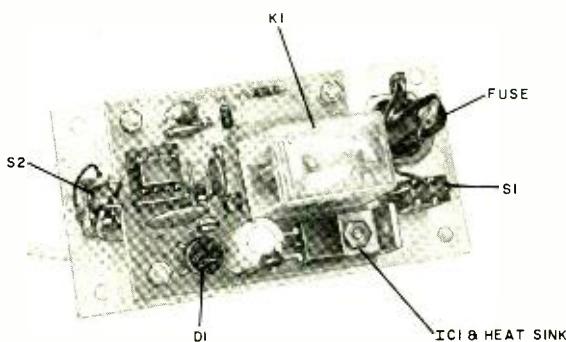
Photo of prototype printed circuit board removed from enclosure.
